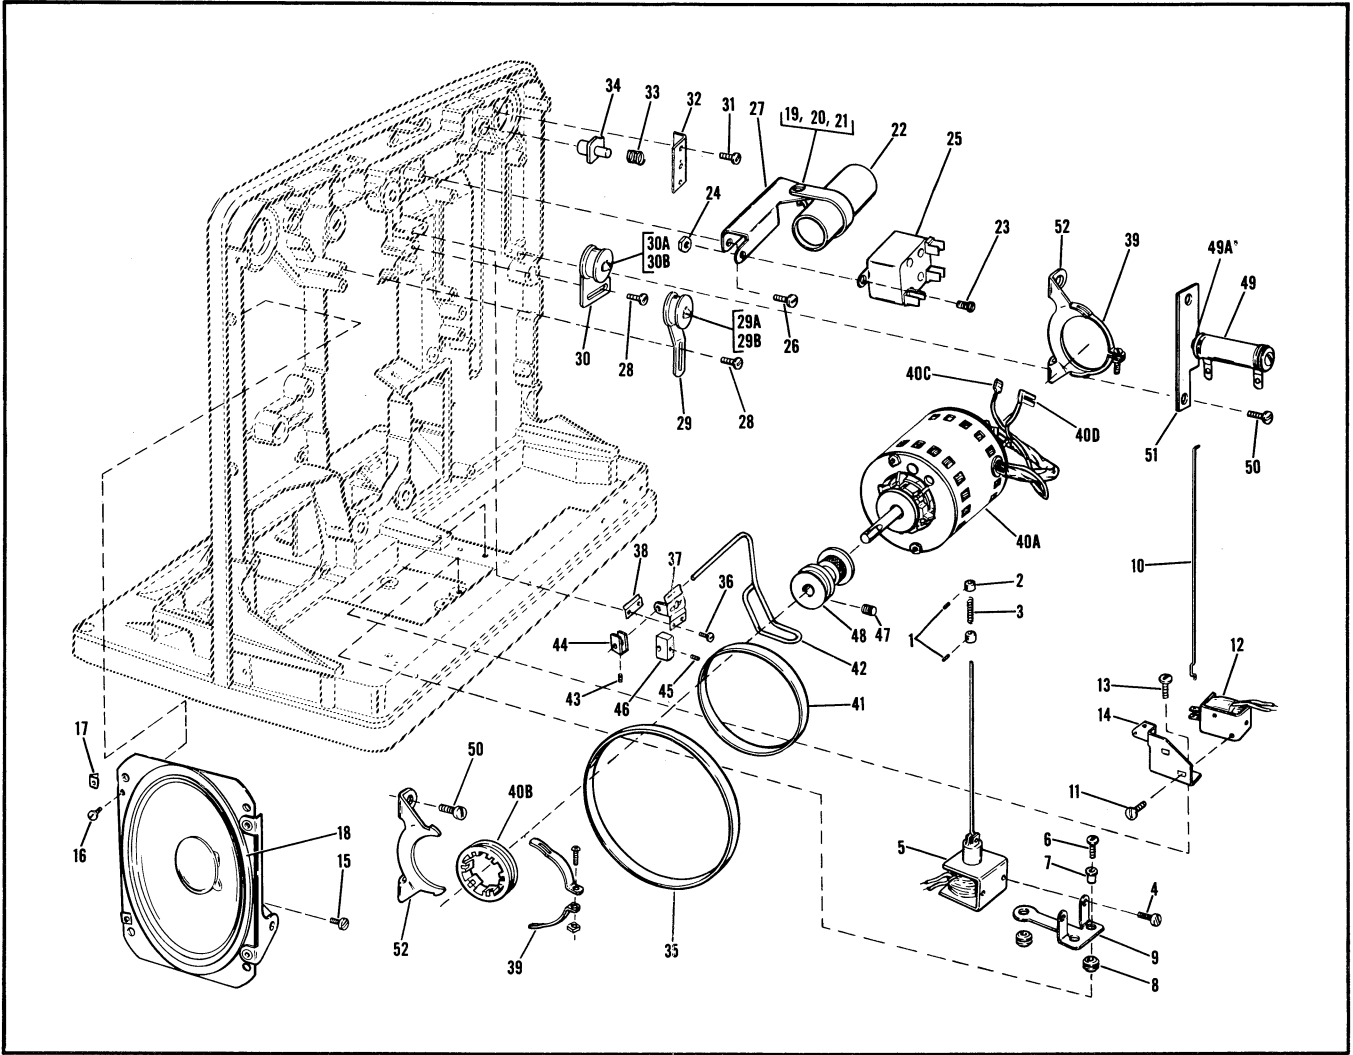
Filmosound Projector Main Plate Exploded (Sheet 3)
